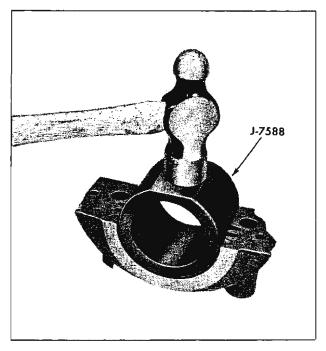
Compressing Lower Seal in Bearing Cap with J-7588
